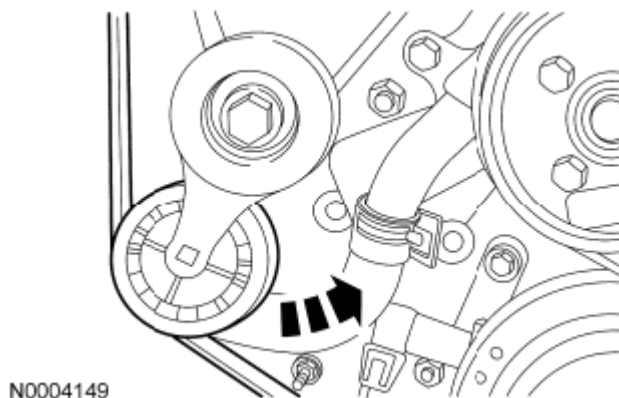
Rotating Accessory Drive Belt Tensioner Counterclockwise
